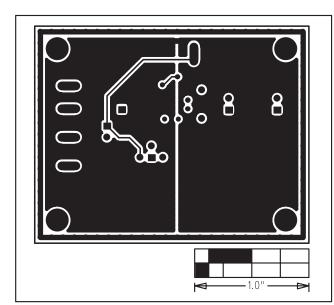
MAX9700B EV Kit PC Board Layout—GND Layer 3
